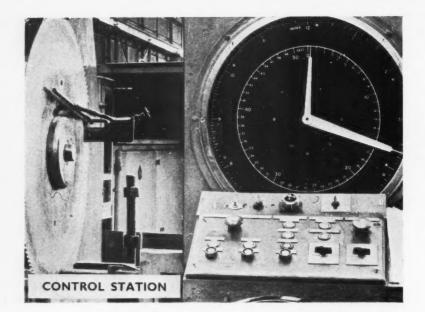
Full mechanisation of the laying out, cutting and drilling of structural sections. (Courtesy: Boulton & Paul Ltd.)
